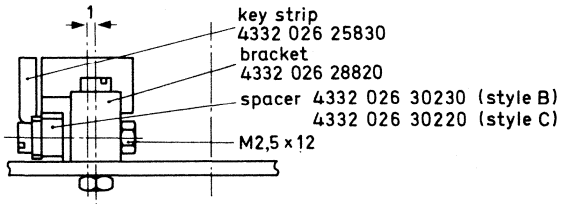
Key strip mounted to a male part with straight dip-solder pins.
